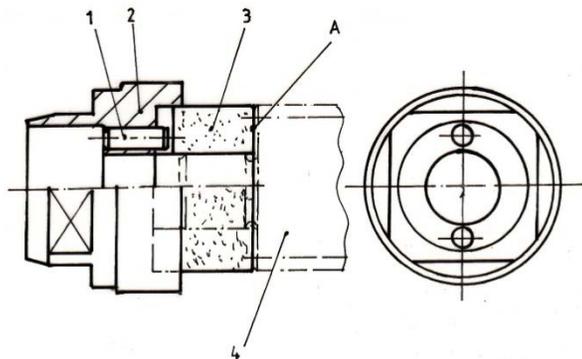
Superfinishing attachment to machining flat surfaces of the gear pump pinions.
